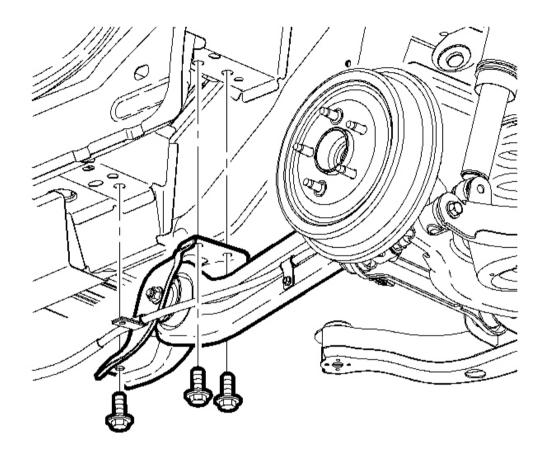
Rear Axle Upper Control Trailing Arm Bracket & Body Bolts Courtesy of GENERAL MOTORS CORP.
